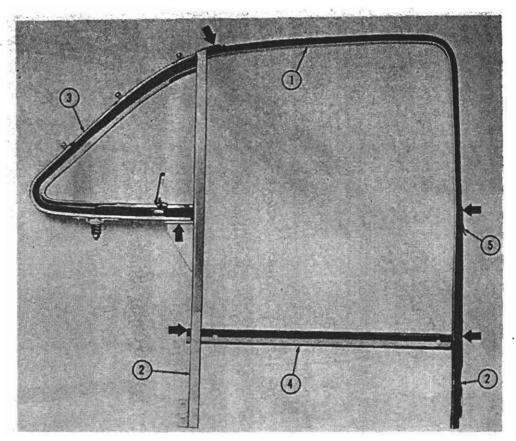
The Assembly is Riveted Or Welded At The Locations Indicated by the Large Arrows.
